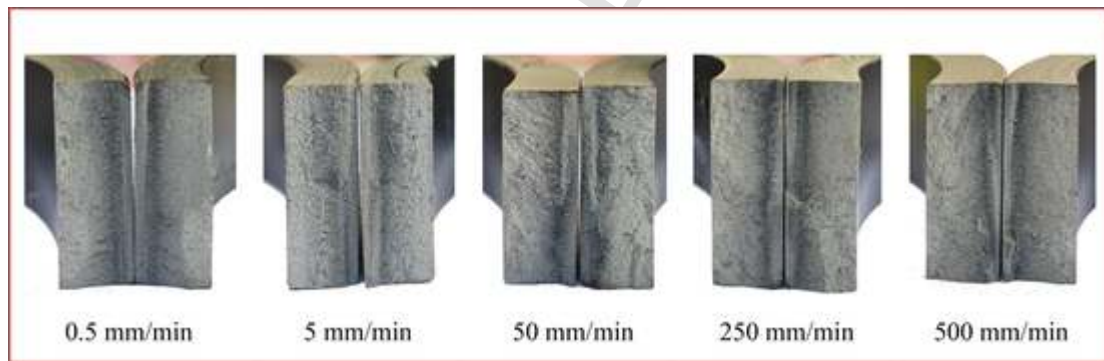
Fractures surfaces of tested C-shaped PVC samples at crosshead rate from (0.5 to 500 mm/min).
